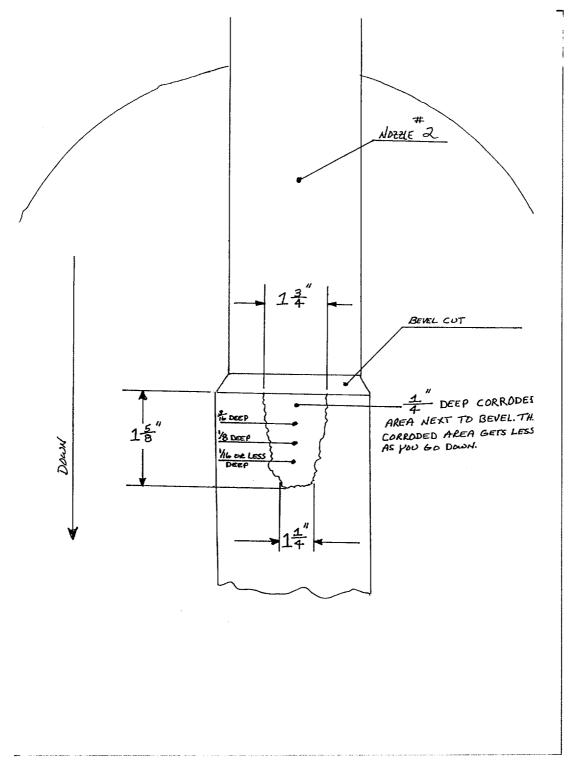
Corrosion at Nozzle 2 Drawing Side View
